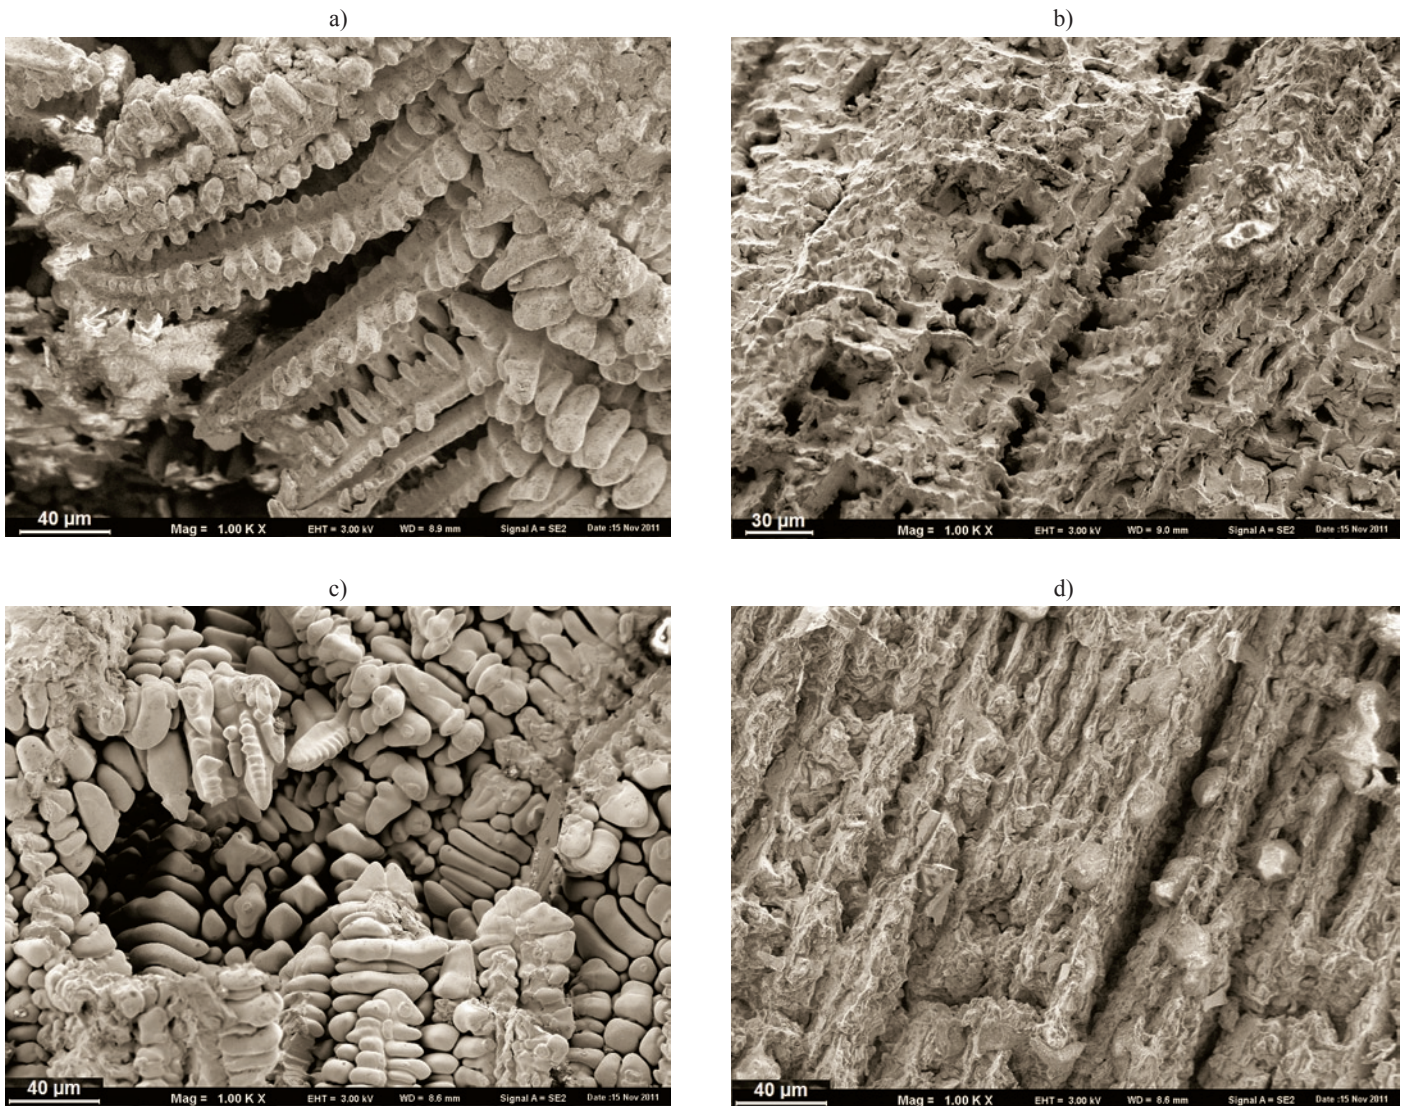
Casting defects in the structure of tested elements: a), b) made by a vacuum pressure casting method: shrinkage – a) crack along the dendrite – b); c), d) made by a centrifugal casting method: shrinkage - c), shrinkage and porosity c) and d)
